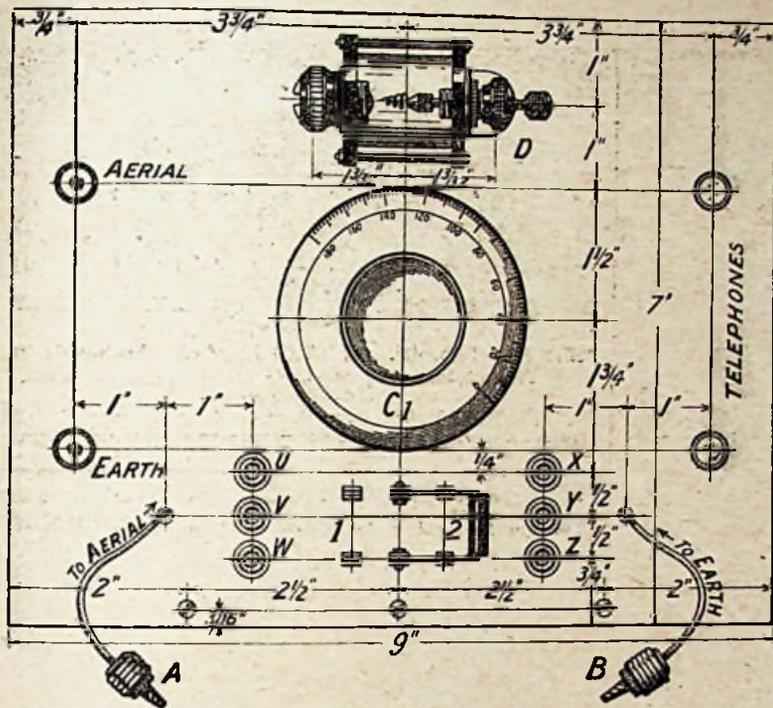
Drilling dimensions are shown above. Blueprint C1038A.
